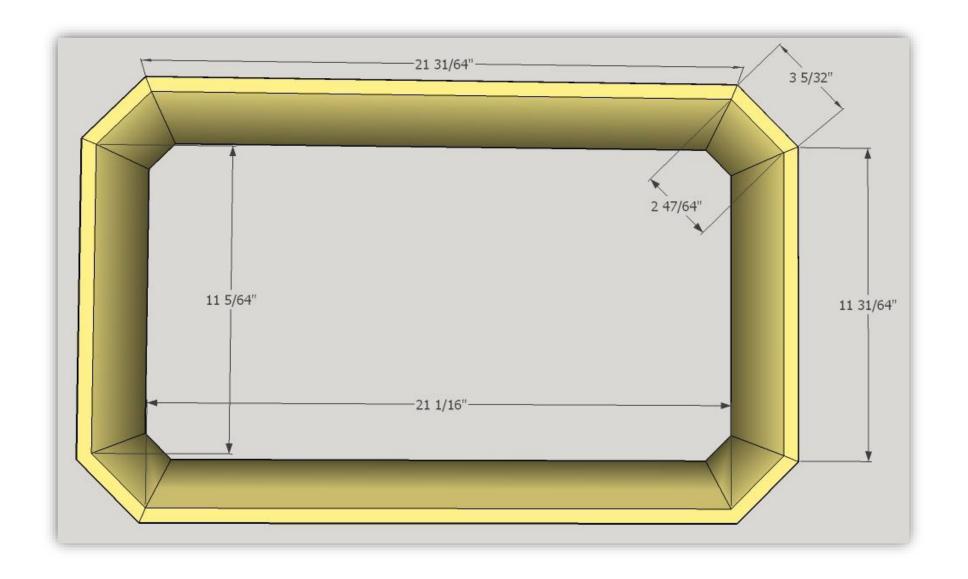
DETAIL DIMENSIONS OF LAP JOINTS & FINAL TOP
